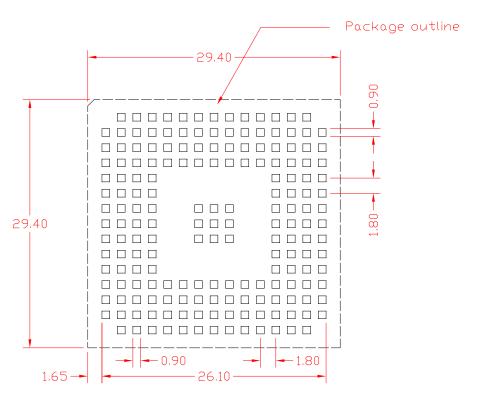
Recommended Footprint, Solder Resist pattern - Top View, 181 pads for LE910Cx variants except for LE910Cx-WWX (dimensions in mm)
